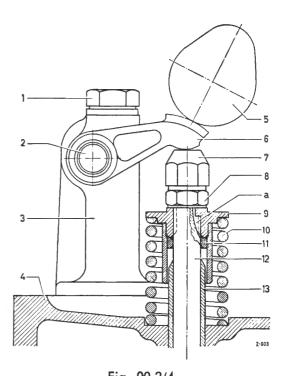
/4 Valve arrangement on Model 190 Dc
